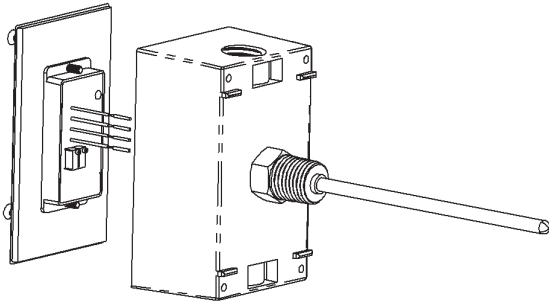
Transmitter mounted to the cover of a Weatherproof Enclosure with an immersion probe
